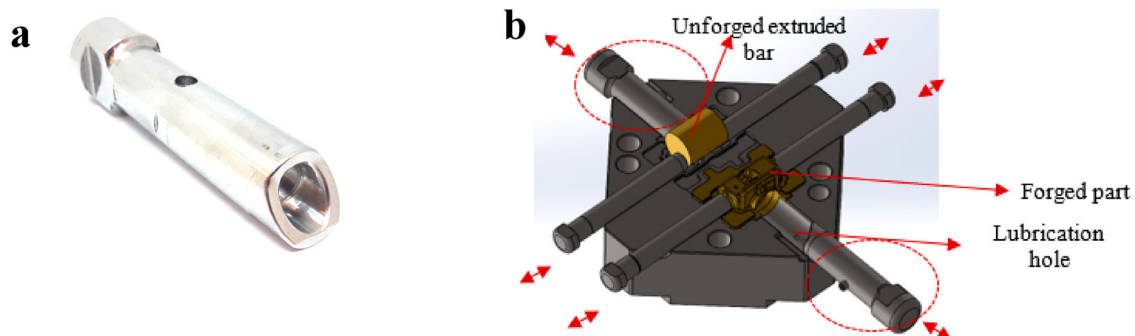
(a) Forging Punch used in this study (b) Punch movements and workpiece in the lower die.
